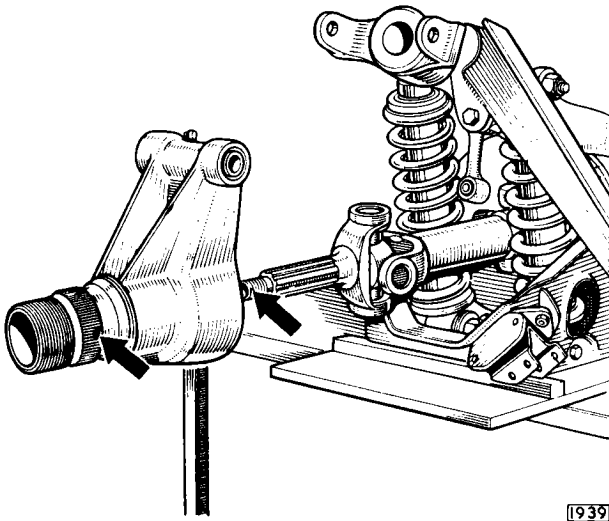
When assembling the hub to the half shaft ensure that the split pin hole and access hole are in alignment
